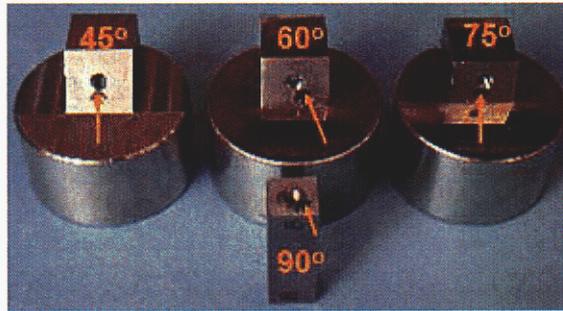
The thread start location of angled and single shear fixture for size #10 screws.
